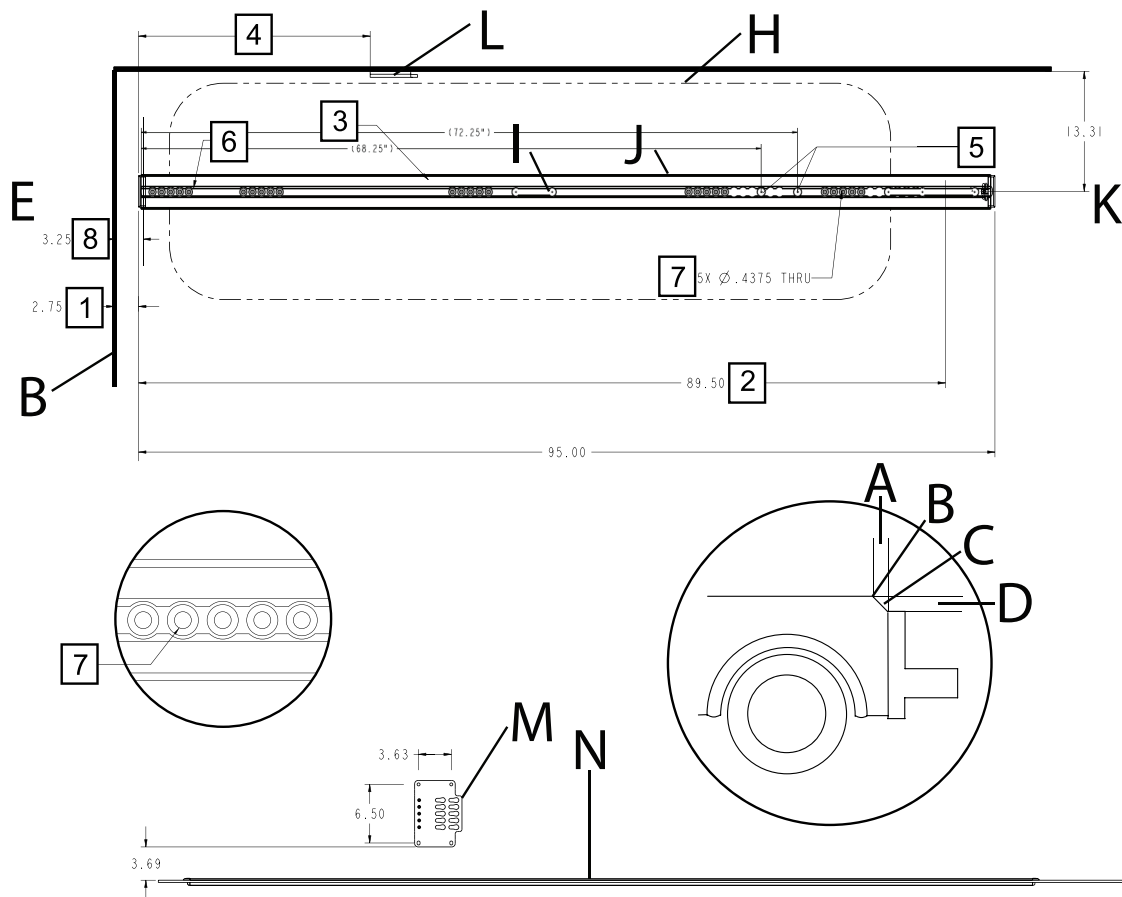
Floor plate with single standard wall mount cot fastener (optional)
